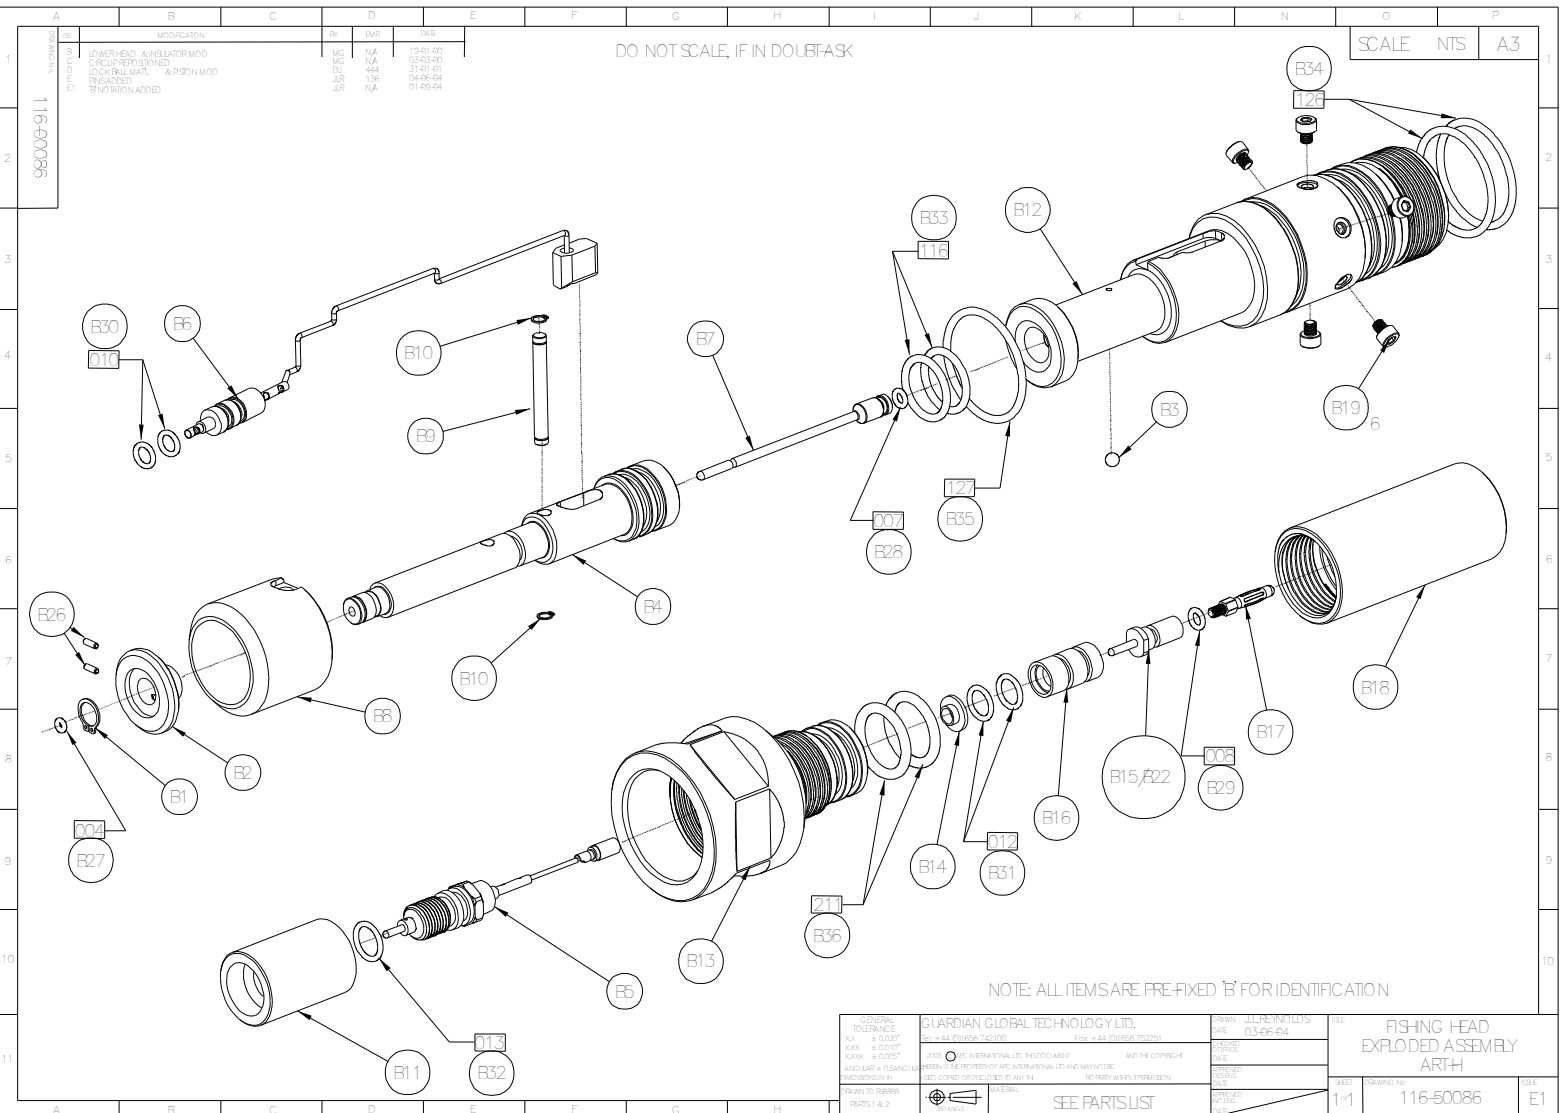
Assembly Drawing, Fishing Head, ART-H - 116-00086-E
